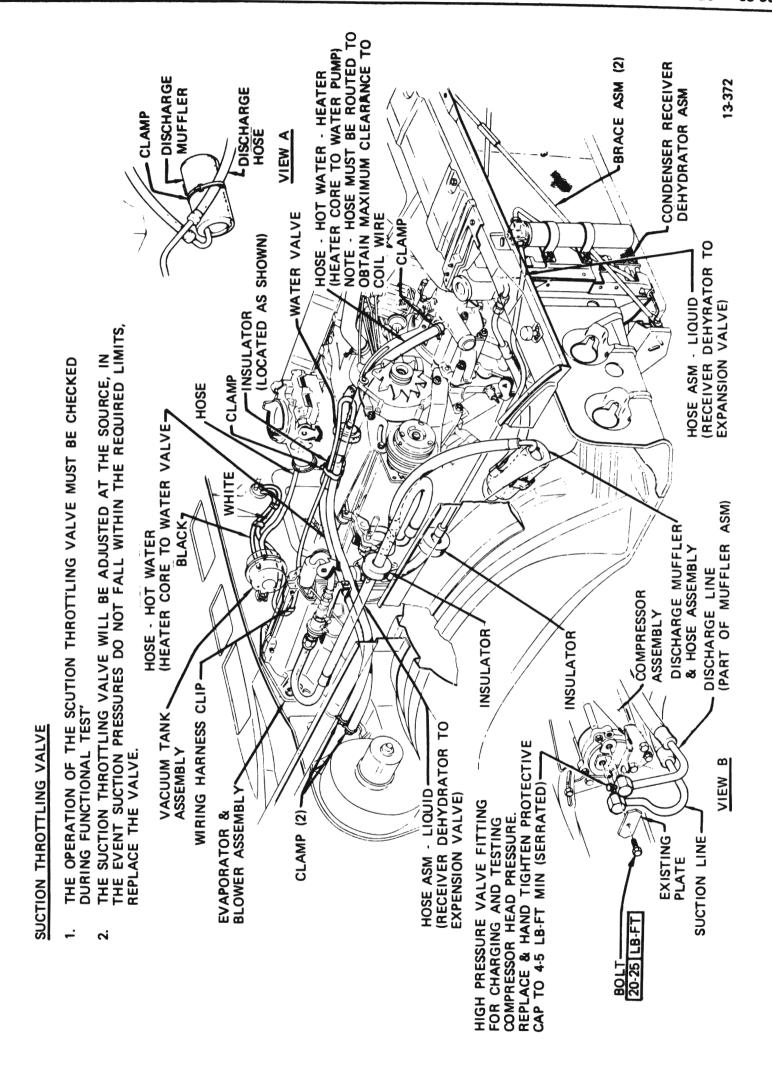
4D-4F-4G-4H - 350-455 Cu.In. Engines - Air Conditioning Installation
